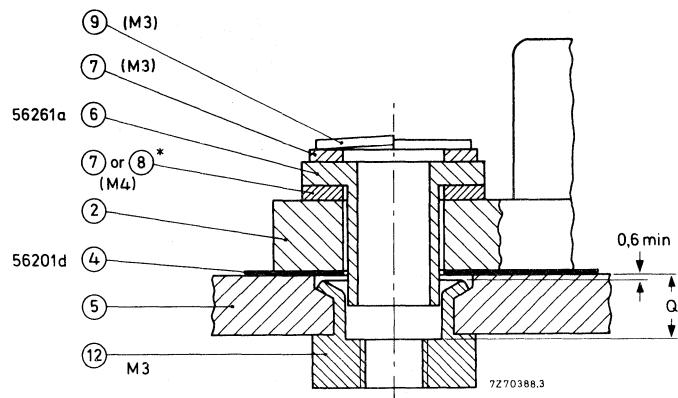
Assembly (partial) for Fig. 10 - insert nuts Q minimum 2,5 mm.
